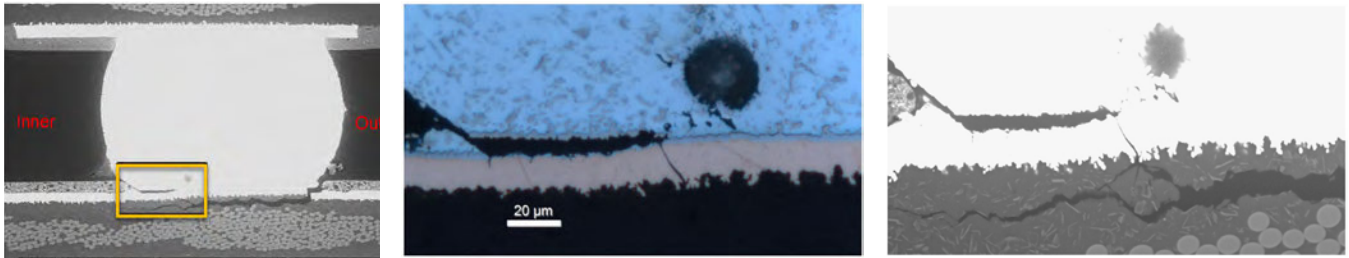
Pad cratering failure mode: (a) full BGA view, (b) the local region of IMC cracking, and (c) SEM image of the same local area showing PCB laminate cracking.
